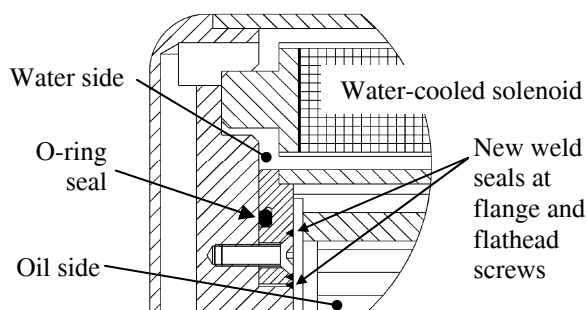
O-ring seal leak area at oil-water interface of solenoid beam tube assembly
